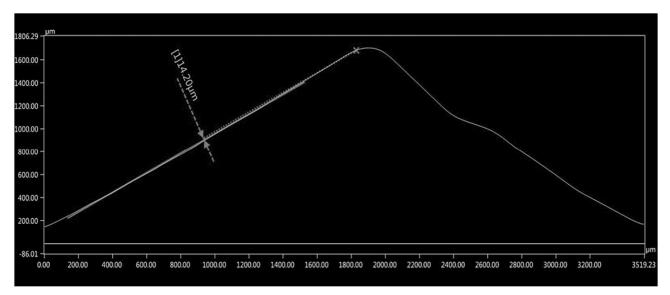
Example of a burn height measurement (for milling conducted using a 4-tooth PCD-coated carbide end mill, vc = 120 m.min-1; fz = 0.08 mm.tooth-1)
